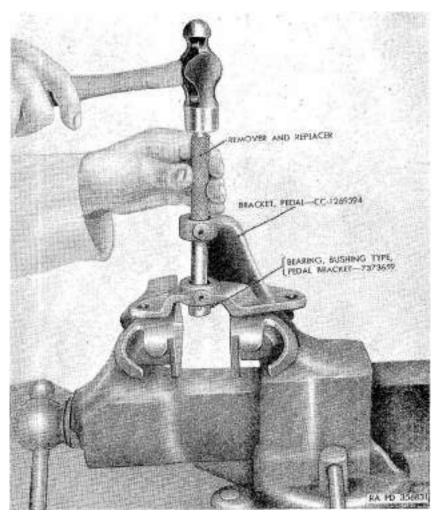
Removing pedal bracket bushing-type bearing from pedal bracket with a bushing remover and replacer.
